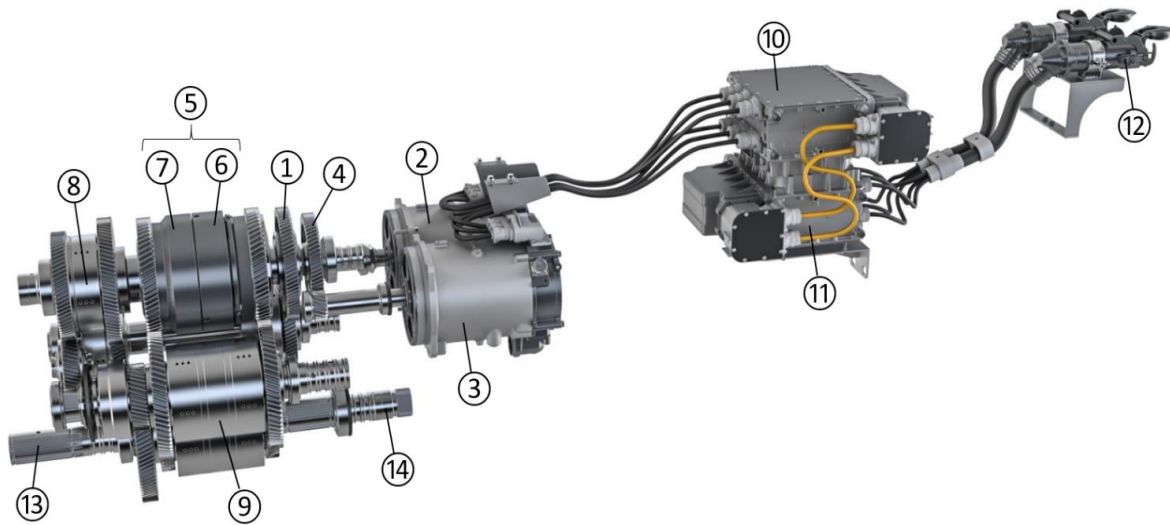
New eAutoPowr transmission of John Deere (① drive through and gear stage from diesel engine to MG1, ② first electric machine (MG1), ③ second electric machine (MG2), ④ gear stage from MG2 to double planetary gear, ⑤ double planetary gear, ⑥ "LO" planetary gear with sun and ring drive, ⑦ "HI" planetary gear with carrier and sun drive, ⑧ reversing circuit, ⑨ switching group module, ⑩ double inverter for MG1 and MG2, ⑪ double inverter for external attachments, ⑫ AEF-interfaces for coupling external attachments, ⑬ mechanical output front axle differential, ⑭ mechanical output Rear axle differential)
